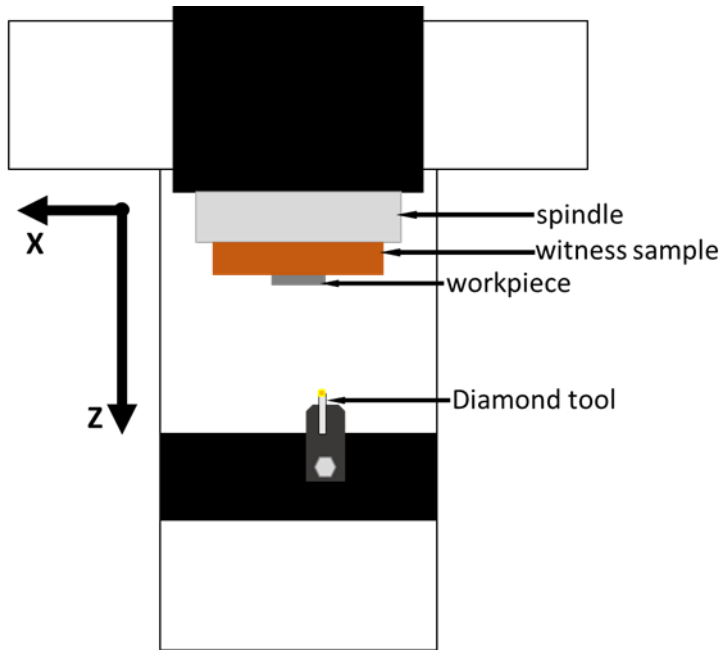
An illustration of the top view of the experimental setup used in testing
